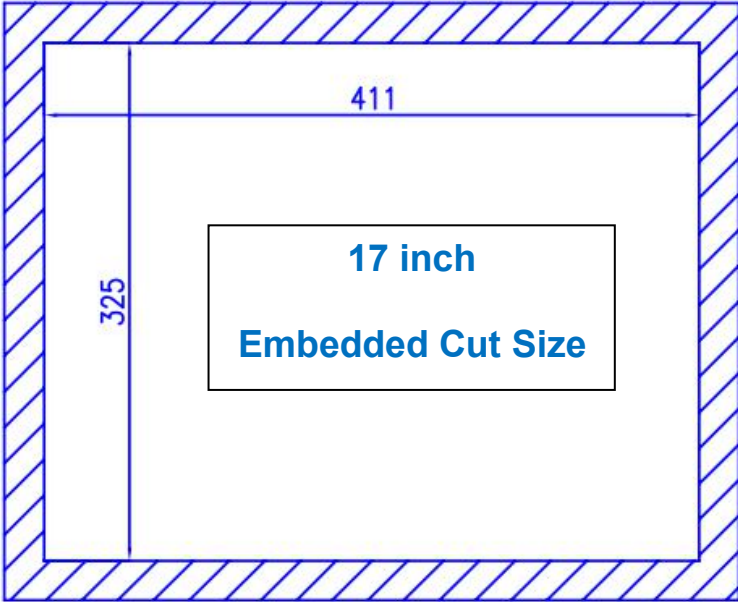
TPC6000-C174-L Embedded Cut Size
